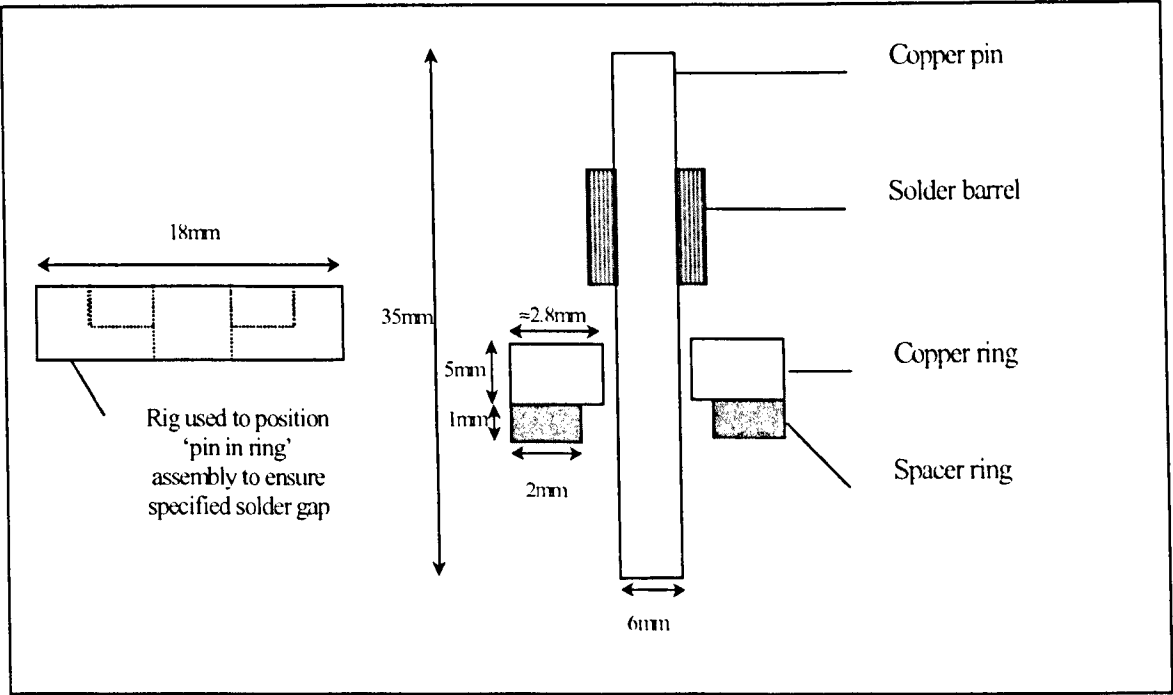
Assembly used for the manufacture of a pin in ring model joint specimen
